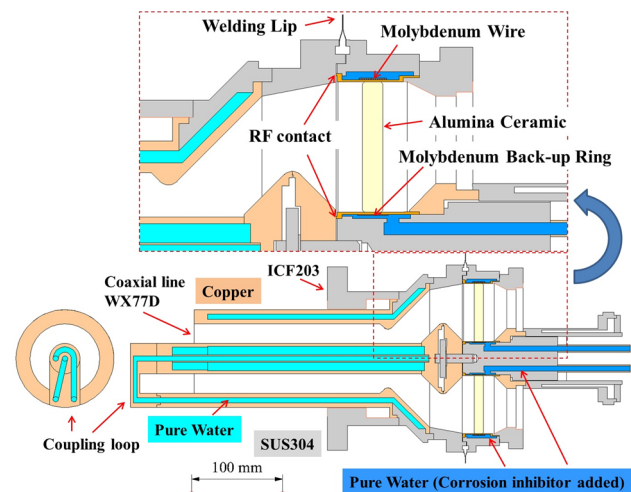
Cross-sectional view showing the prototype coupler WRX15.
